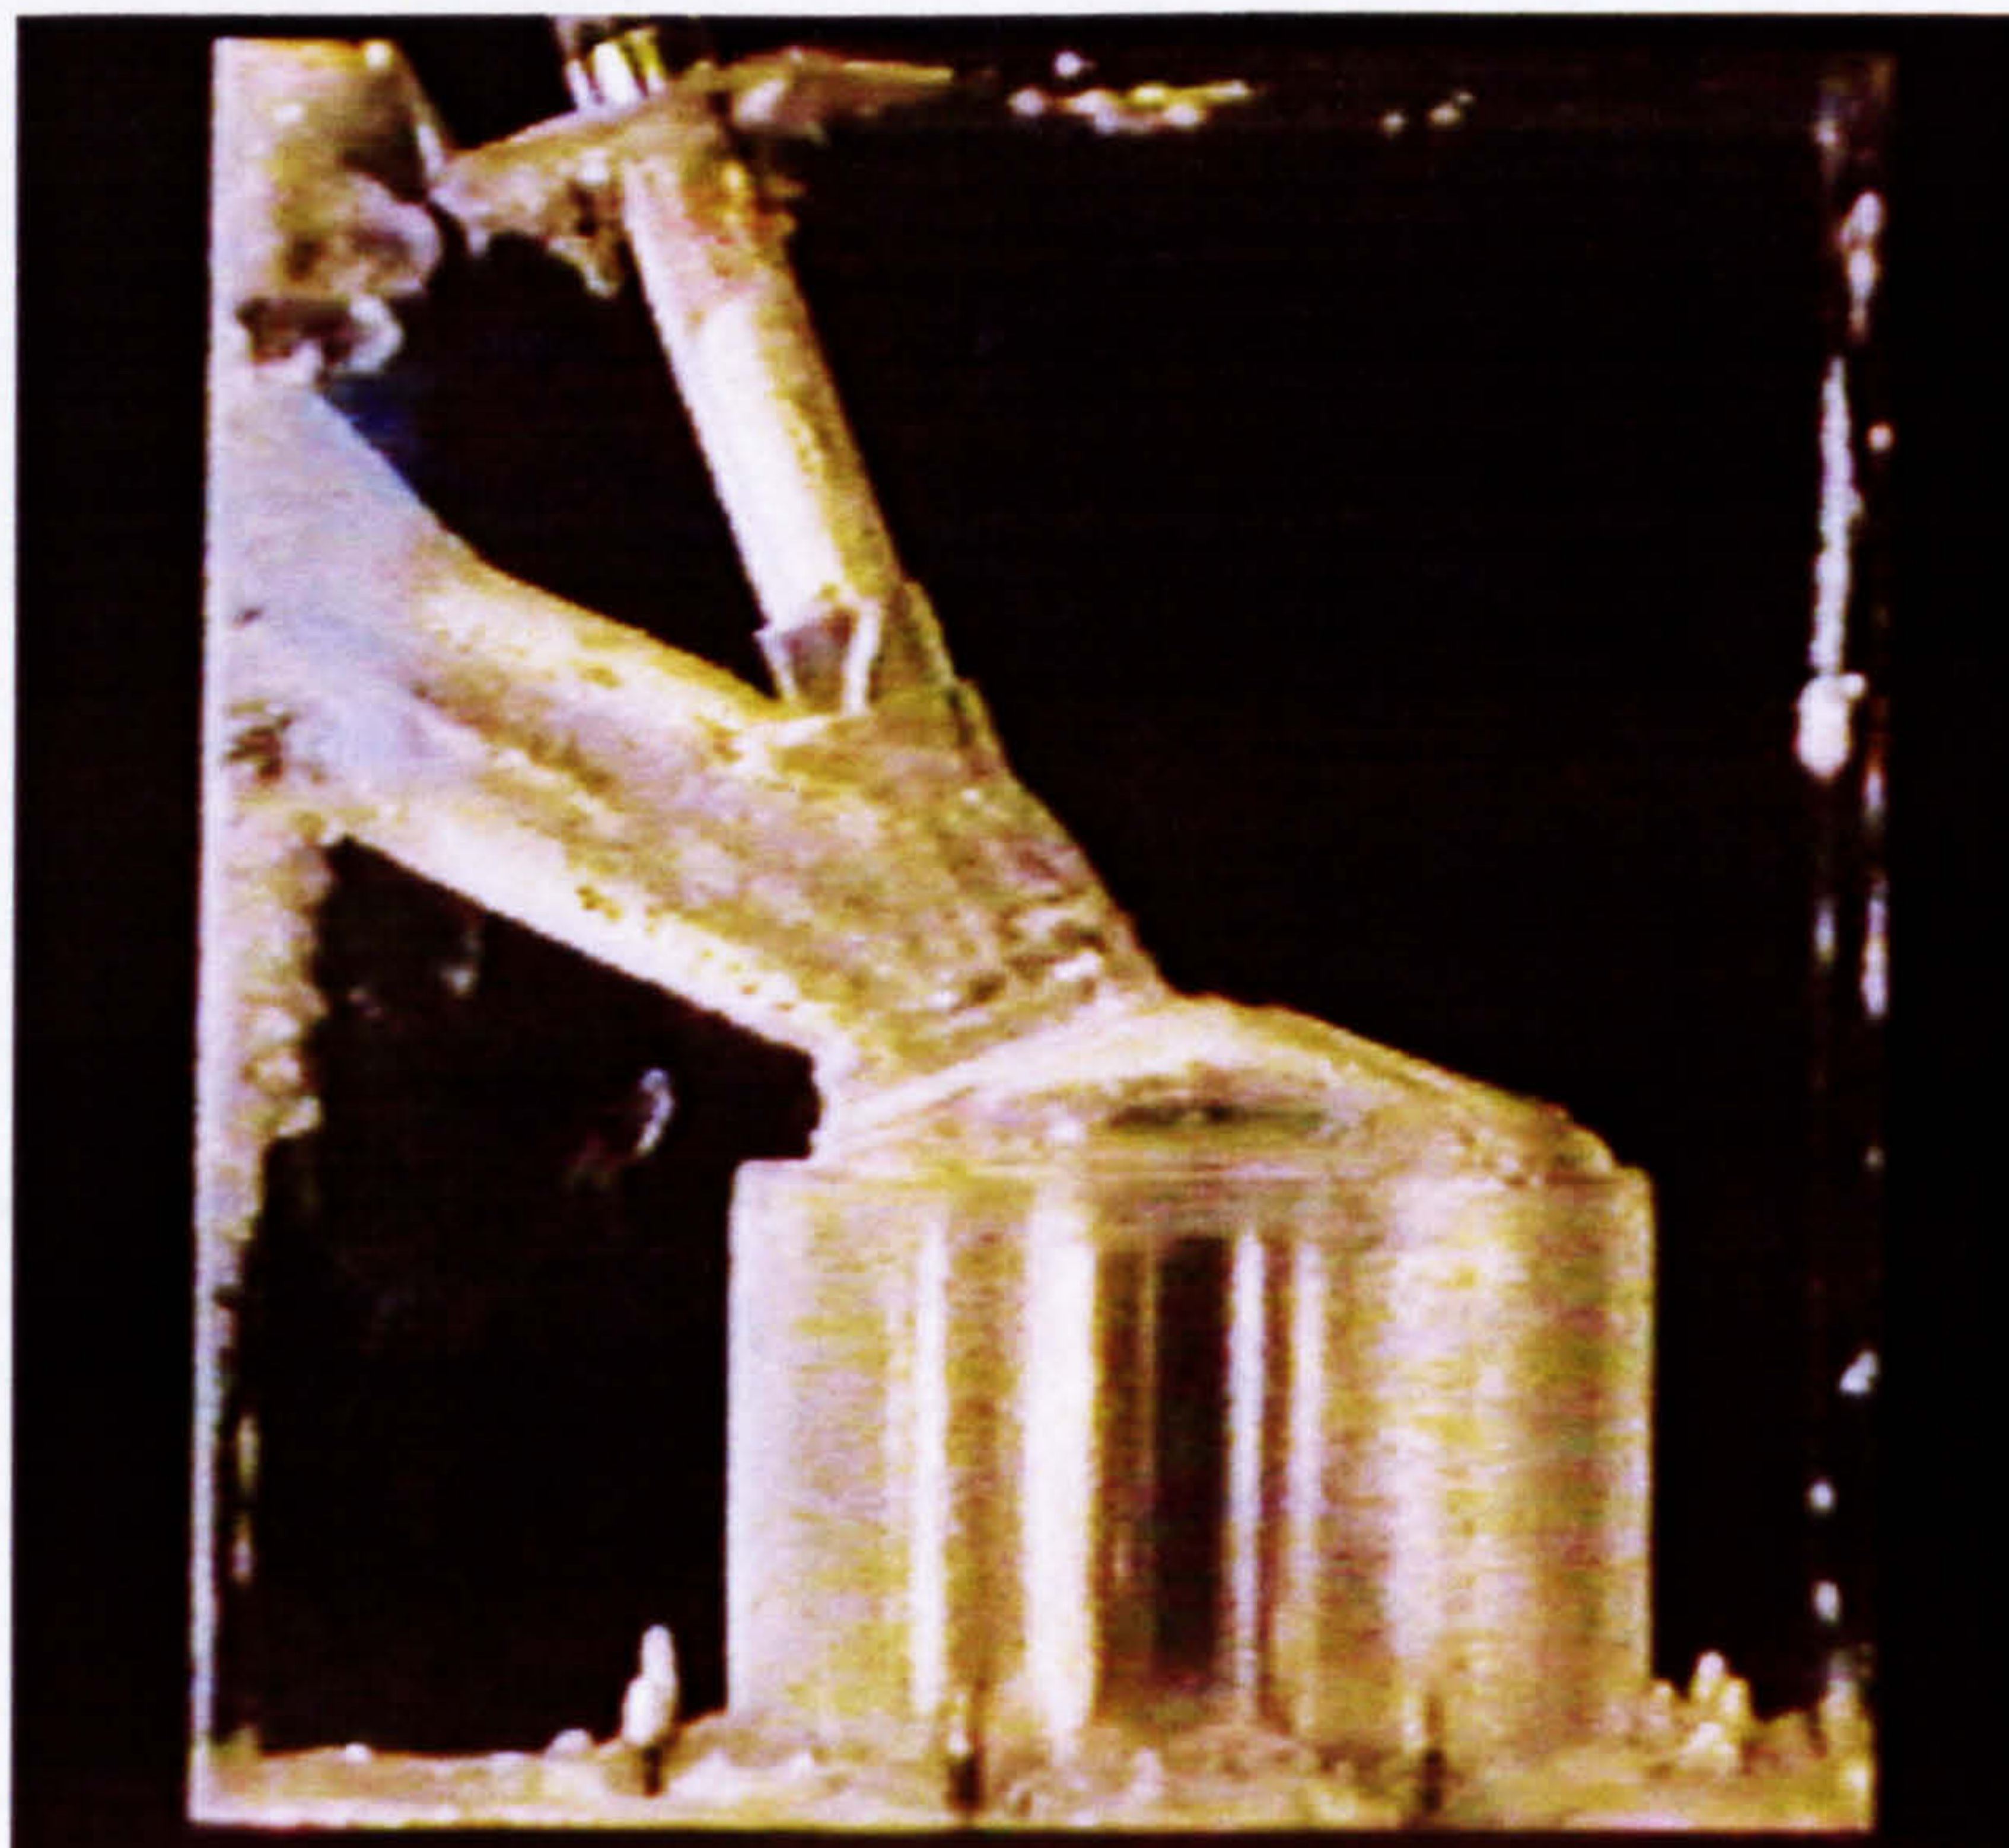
(a) Mould of engine inlet ports, combustion chamber and cylinder produced from rubber Vynamold material
